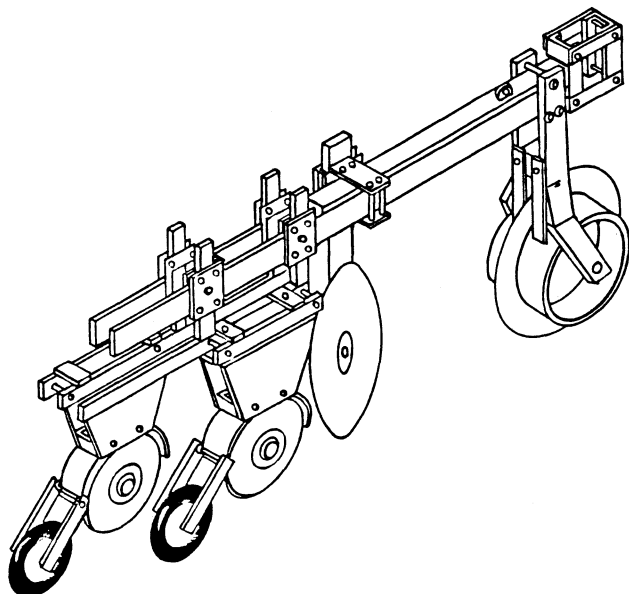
Single drill unit with coulter gauge wheel, 56 cm diameter concave disc to remove atrazine treated soil, paired double disc openers, and 2.5 by 25.0 cm press wheels.
